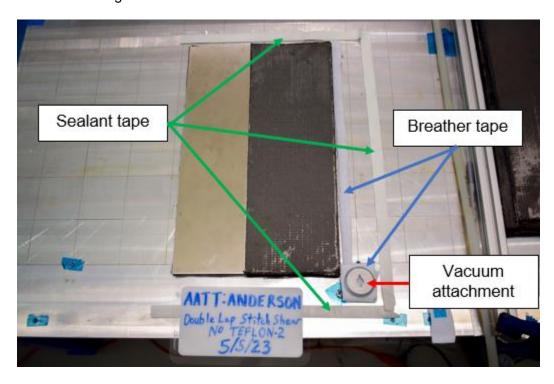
Placement of sealant tape, breather cloth, and vacuum attachment.
